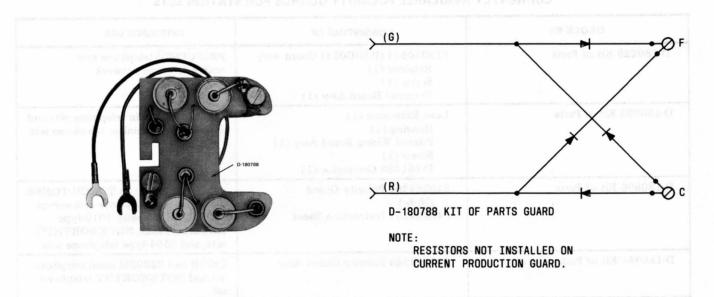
D-180788 Kit of Parts (MD) and Schematic
